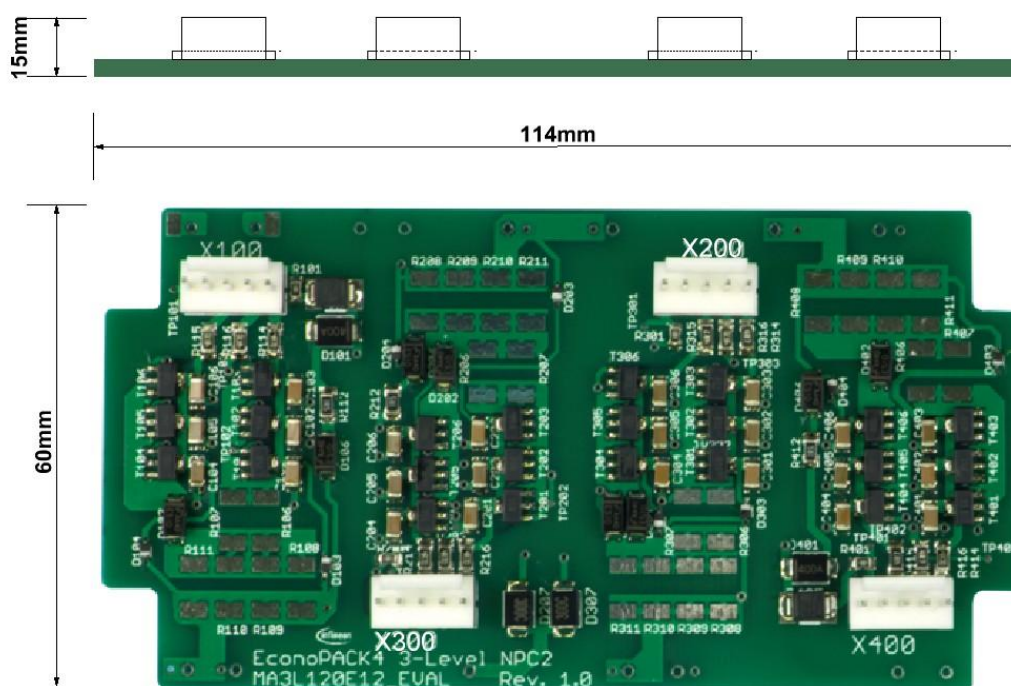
Mechanical dimensions of the MA3L120E12_EVAL
